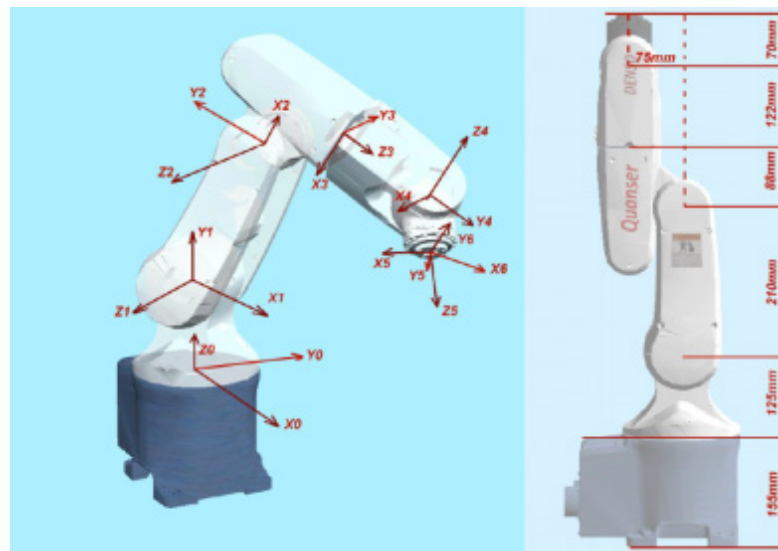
World frame, joint frames and dimensions used for kinematics calculation [68]
